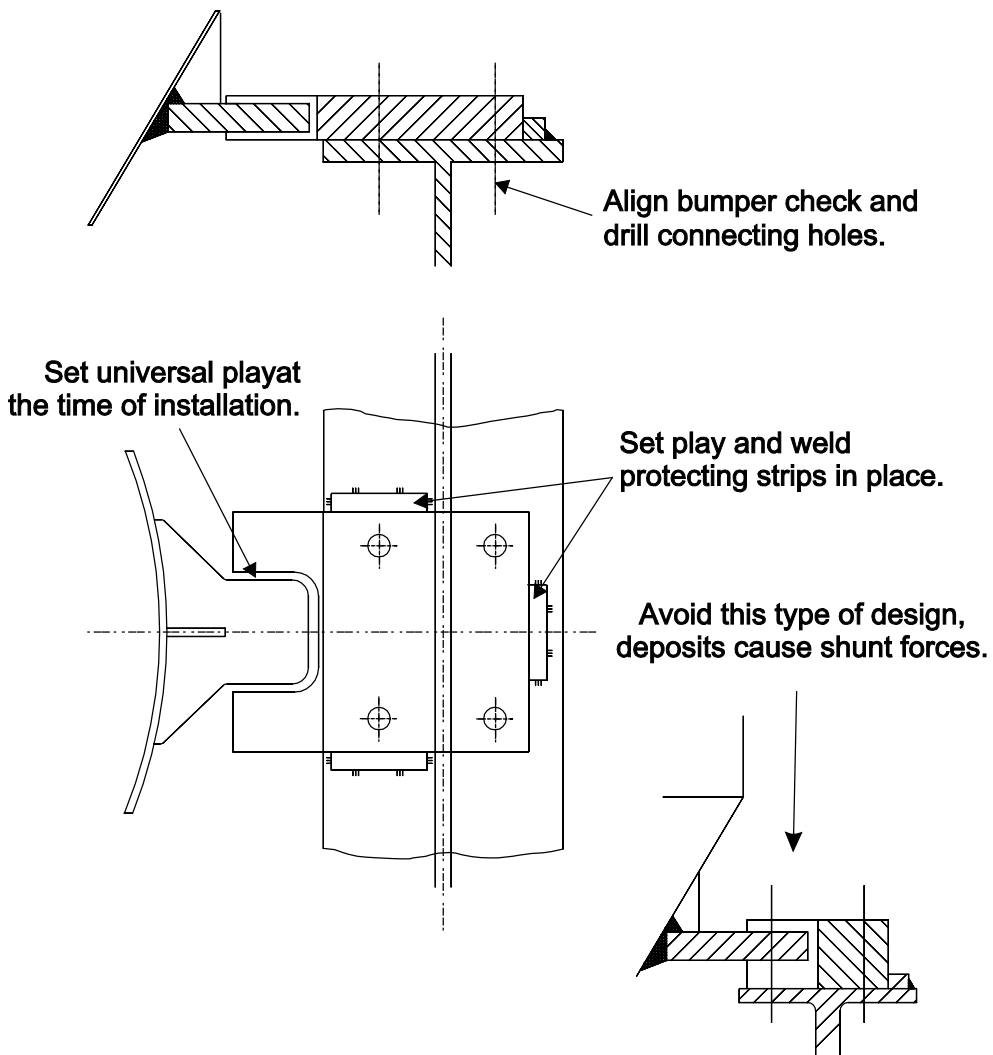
Operating principle of the bracket-type bumper for bin weighers
